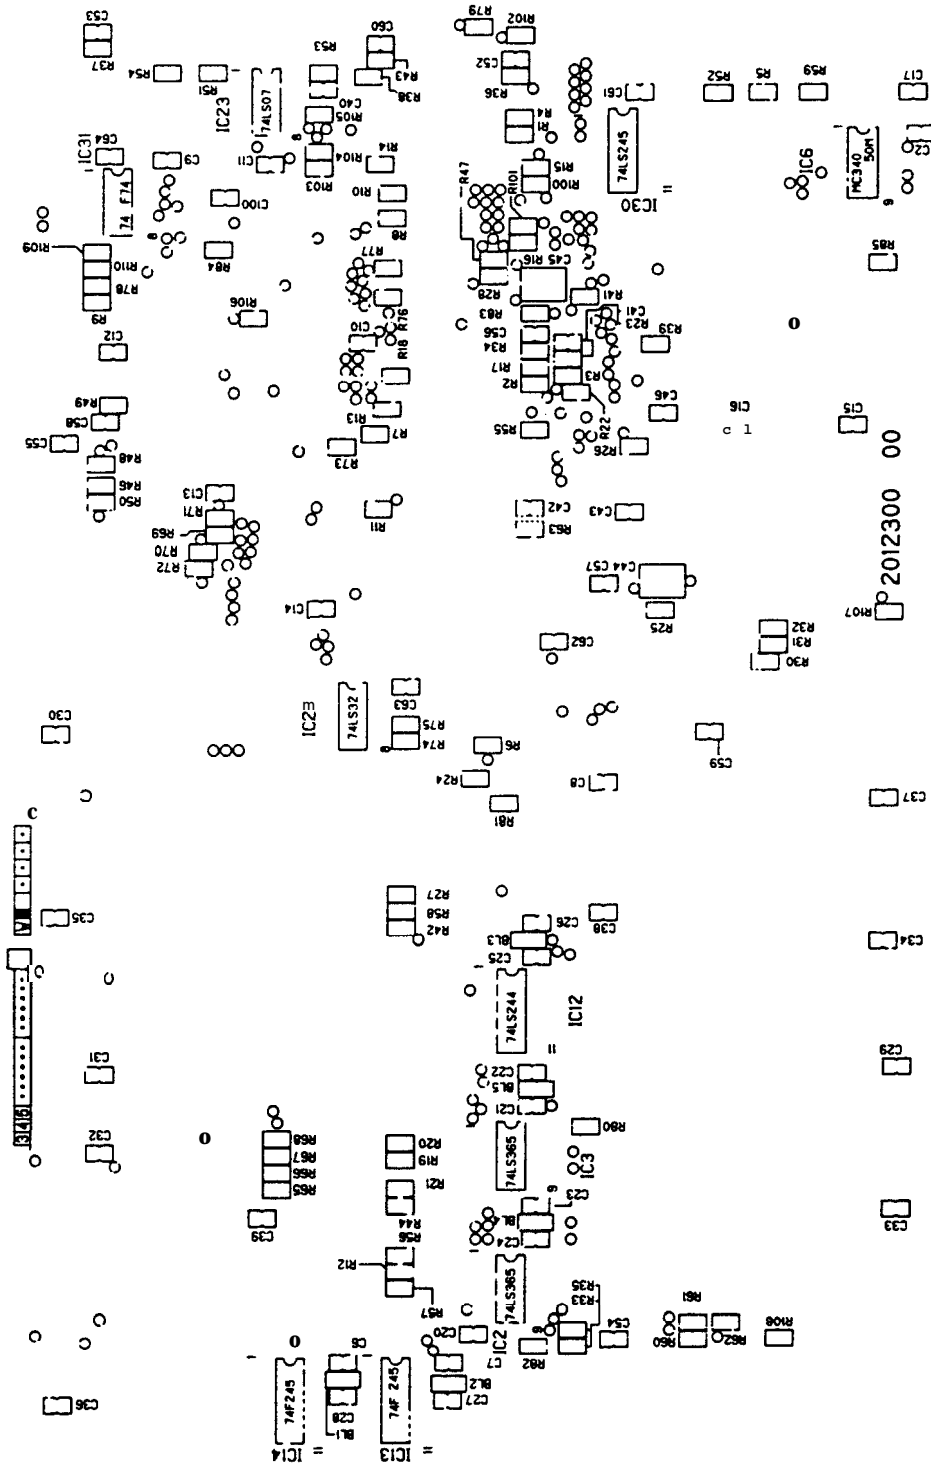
C125 MAIN Board Component Layout (Rear Side)
